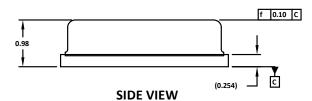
5-Terminal Chip Array Small Outline No Lead Cavity 3.50 mm × 2.65 mm × 0.98 mm Body Dimensions shown in millimeters
